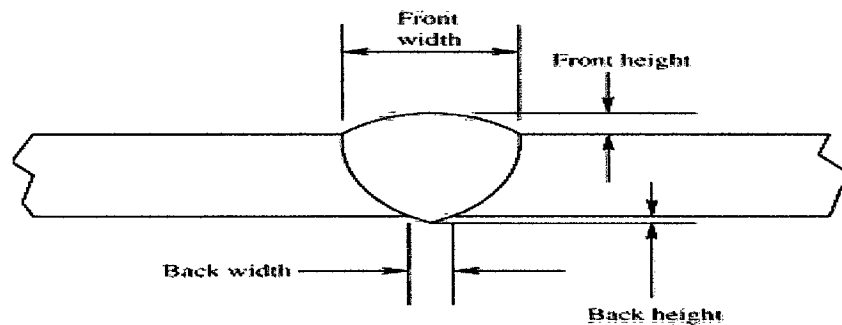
A schematic diagram showing the weld bead geometric parameters
